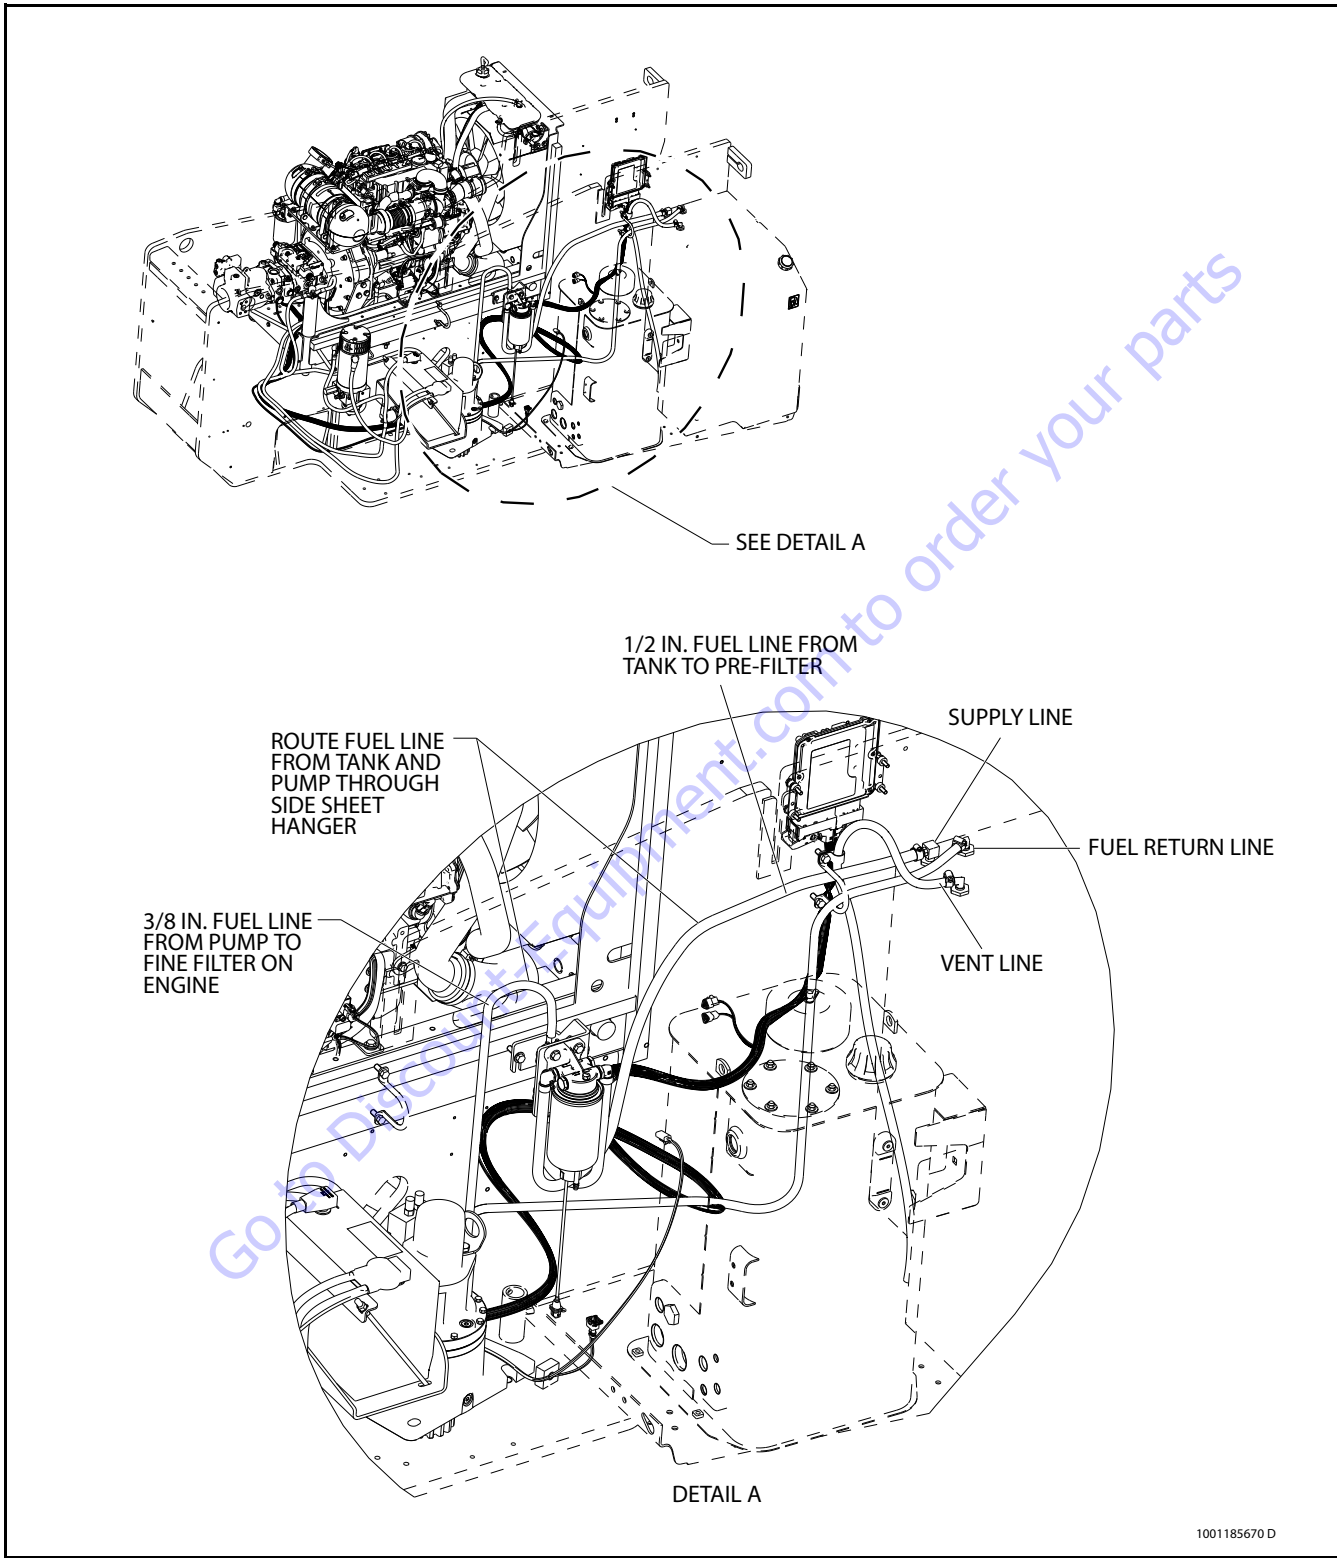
Deutz 2.9 L4 Engine Installation - Sheet 1 of 5
